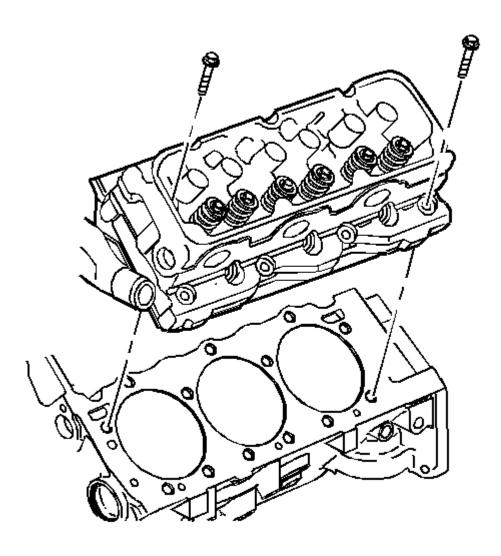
Identifying Cylinder Head & Cylinder Head Bolts Courtesy of GENERAL MOTORS CORP.
